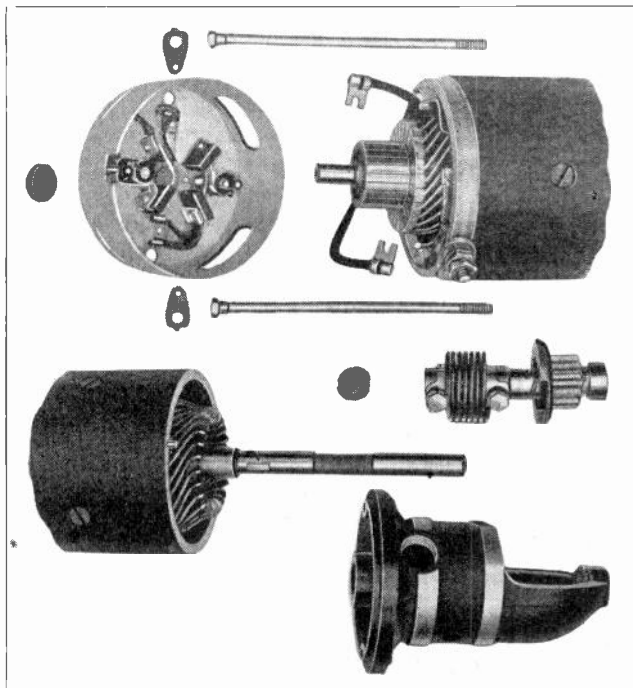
Disassembled view of a starting motor showing commutator end and brushes above, and drive end with Bendix drive and pinion below.
